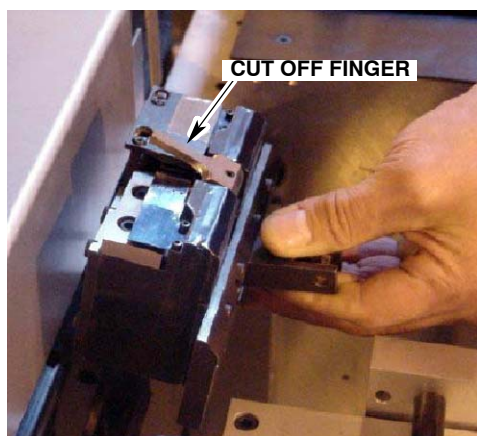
The Cut Off Finger Should Be Horizontal
